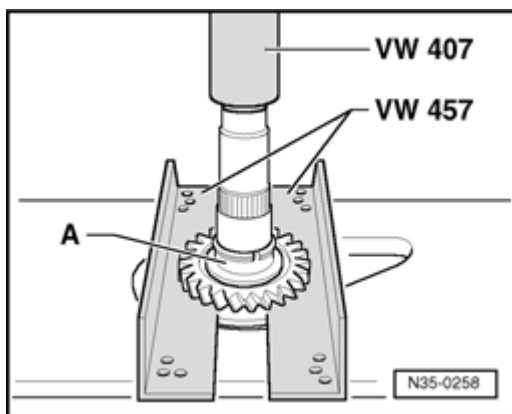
Pressing off sleeve -A- over reverse gear wheel
